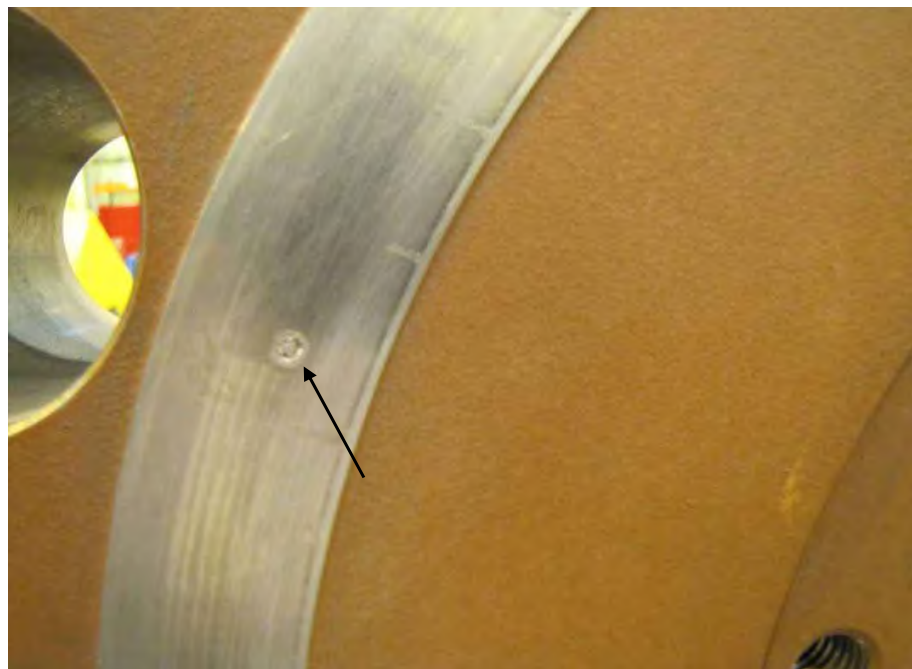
Close-up photograph of intermediate pressure turbine rotor generator end coupling showing evidence of melting (arrow) on machined face.
